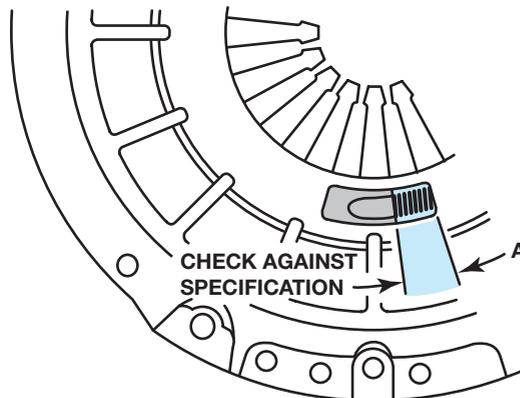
When installing a pressure plate with a self-adjusting fulcrum ring, check dimension A. If the distance exceeds the specification, follow the proper procedure to adjust it.
